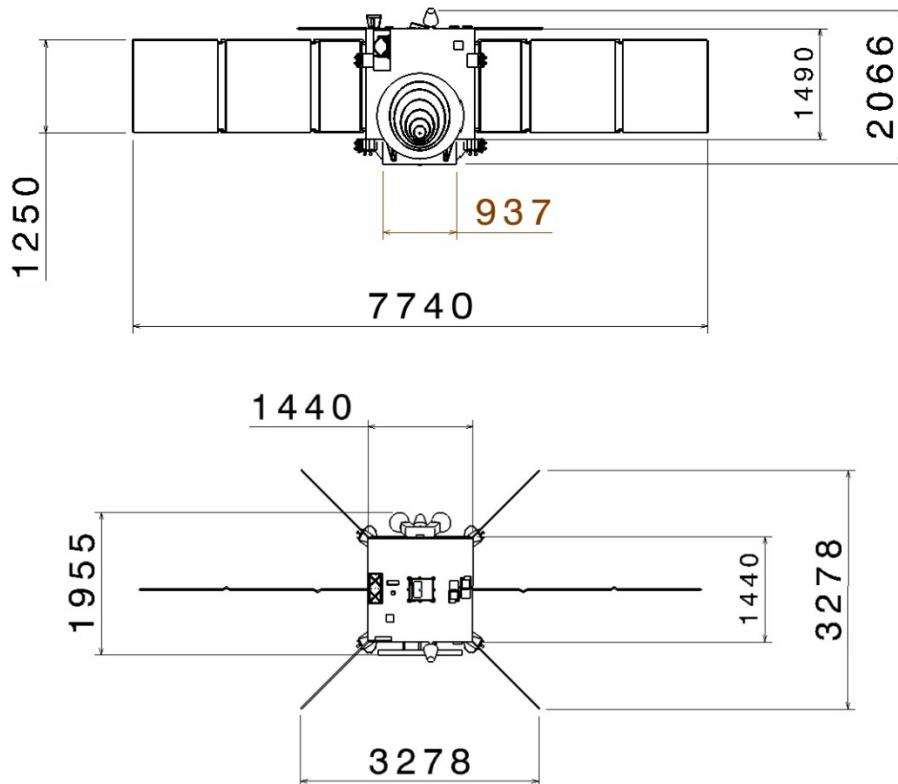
Outer dimensions for the AIM-3 deployed spacecraft
